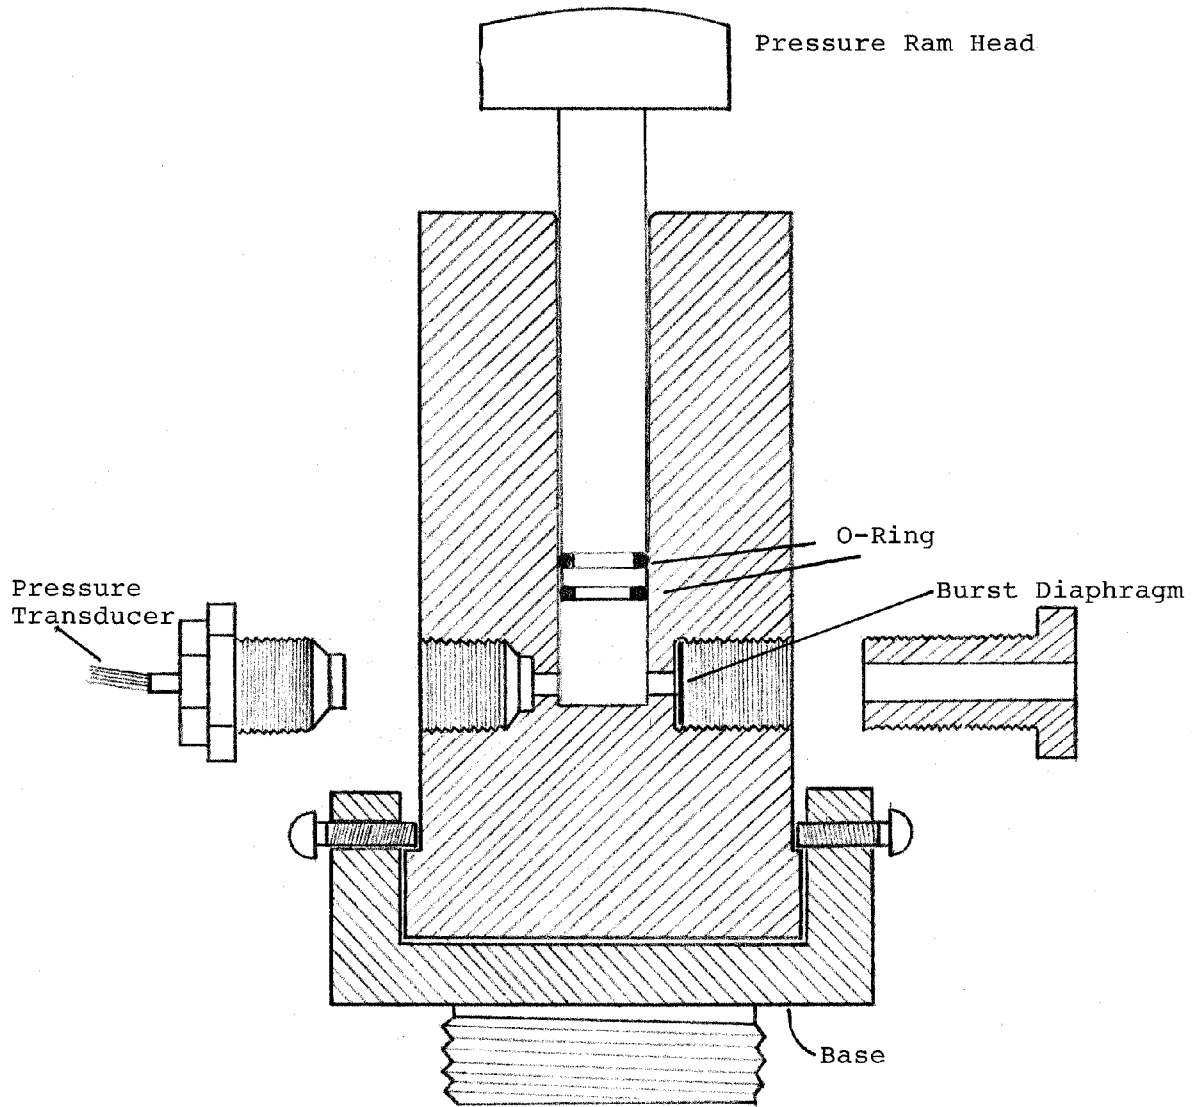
Compression Test Apparatus - Bureau of Explosives using Impact Tester.
